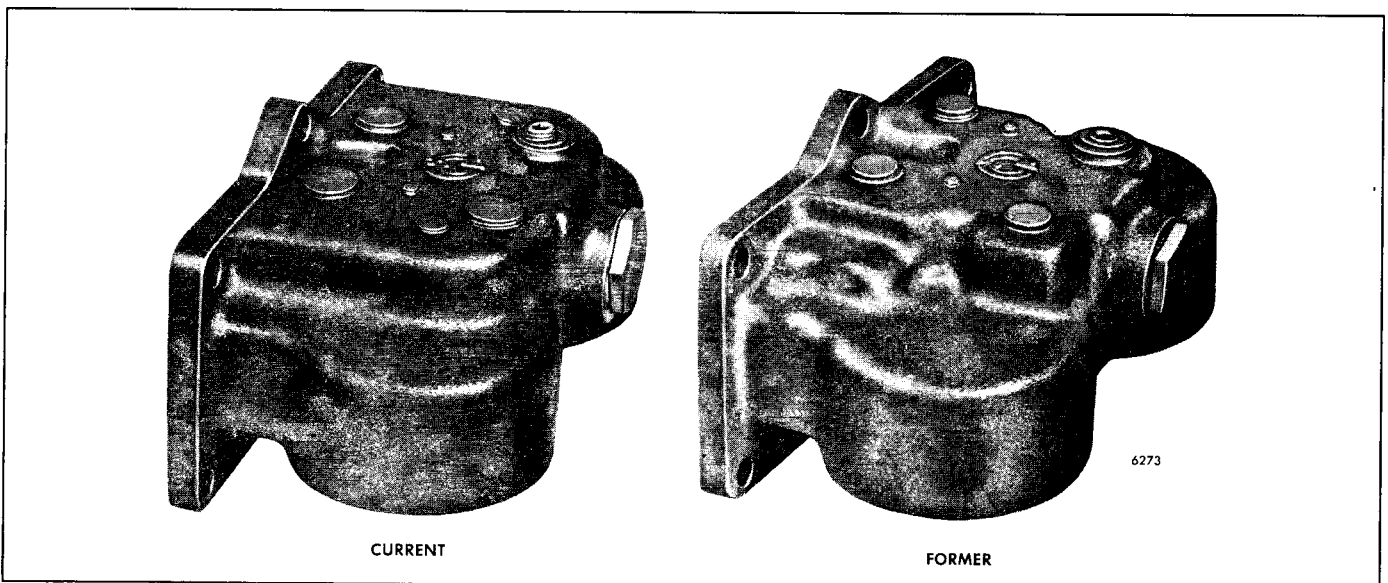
Spin-On Lube Oil Filter Adaptor Assembly
